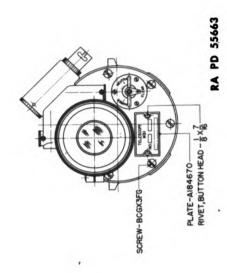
Lamp Bracket Assembly—Section Through B-B and C-C (Location of section planes is shown in fig. 8)
